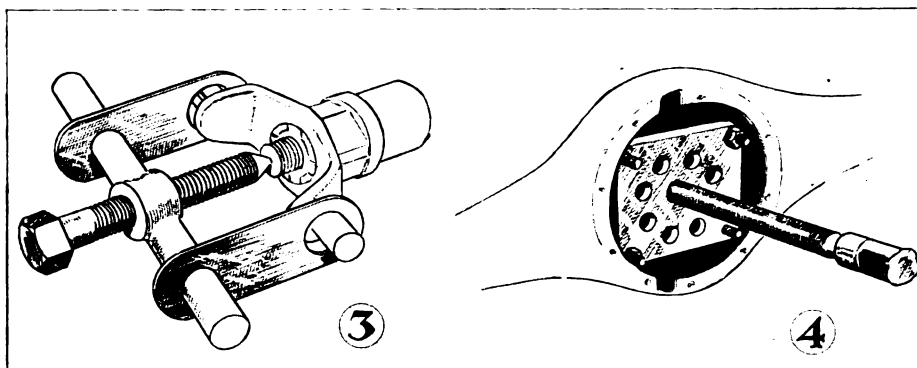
Puller for front half of universal joint. Fig. 4—To remove the drive pinion, a plate is bolted to the four studs and pressure applied to the shaft
